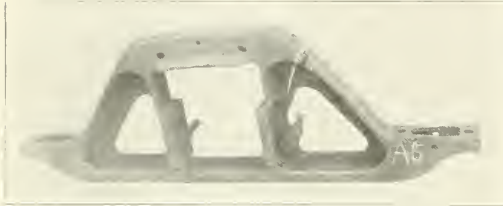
Book A, Test 3. Side Frame Broken Through Crack. Breaking Load, 259,000 Lb.
